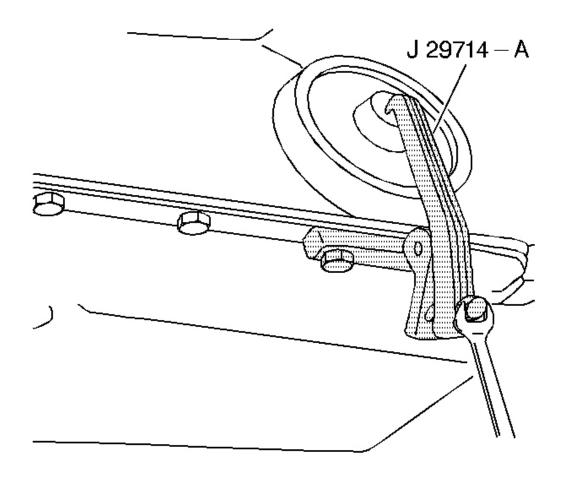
Compressing The Servo Cover Using J 29714-A Courtesy of GENERAL MOTORS CORP.
